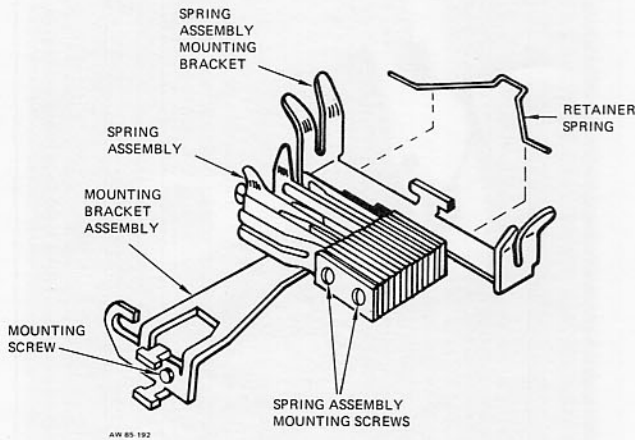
Model 82577 Hold Switch Assembly, Component Locations
